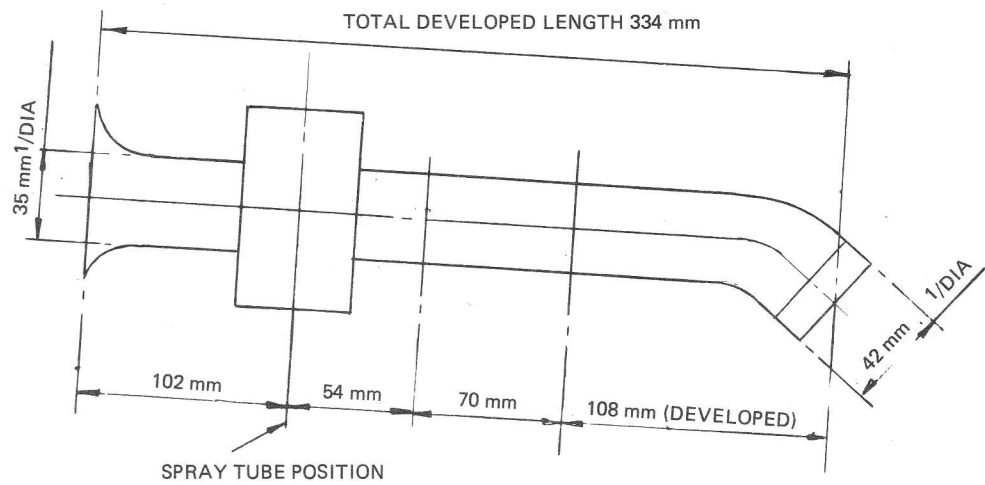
Inlet system dimensions. Applicable to Design 'A'.
